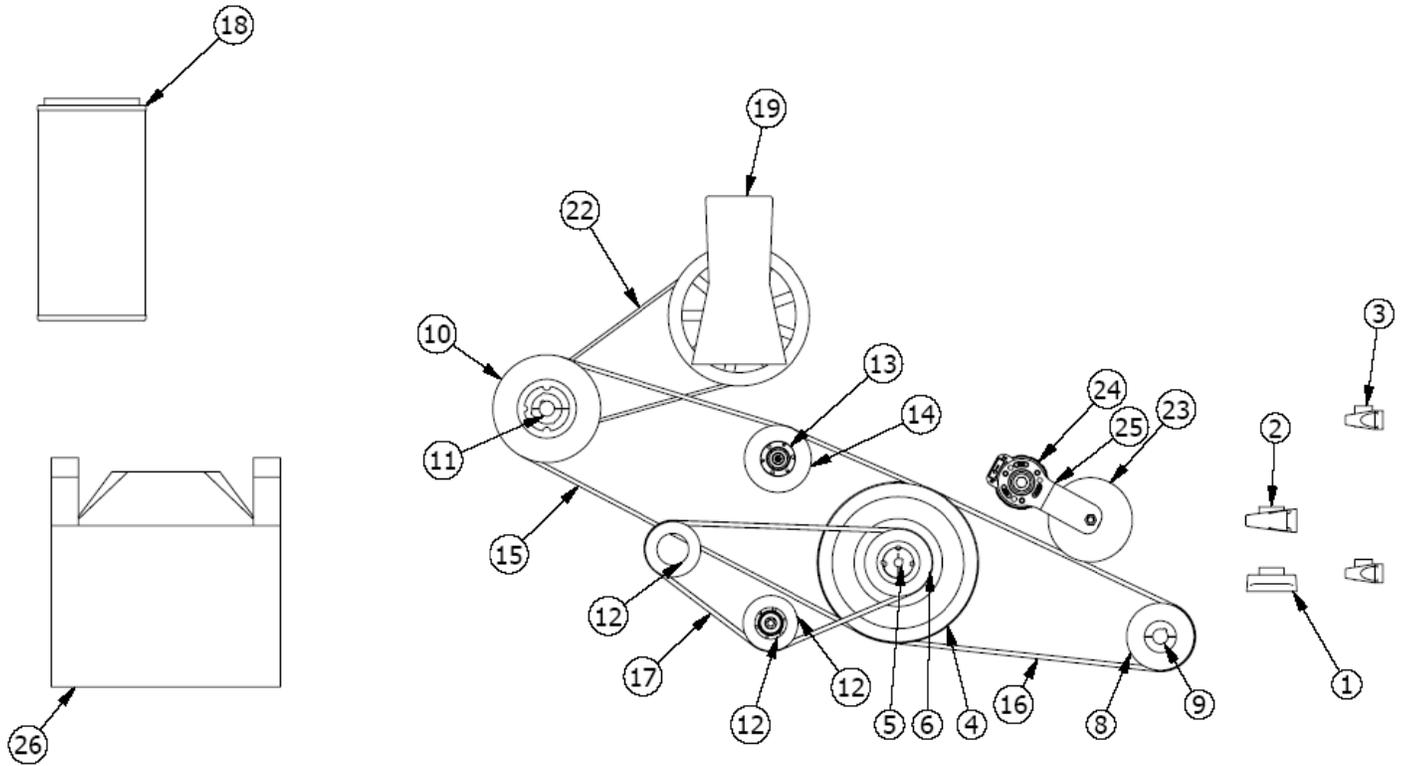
B: BELT/SHEAVE ASSEMBLY – SIDE VIEW
